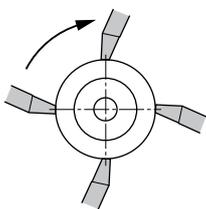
Checking the axial alignment with a calliper gauge – circumferential check
